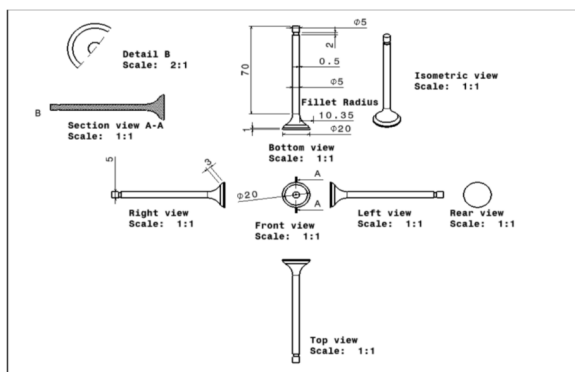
Existing exhaust valve design of 10.35 mm fillet radius
